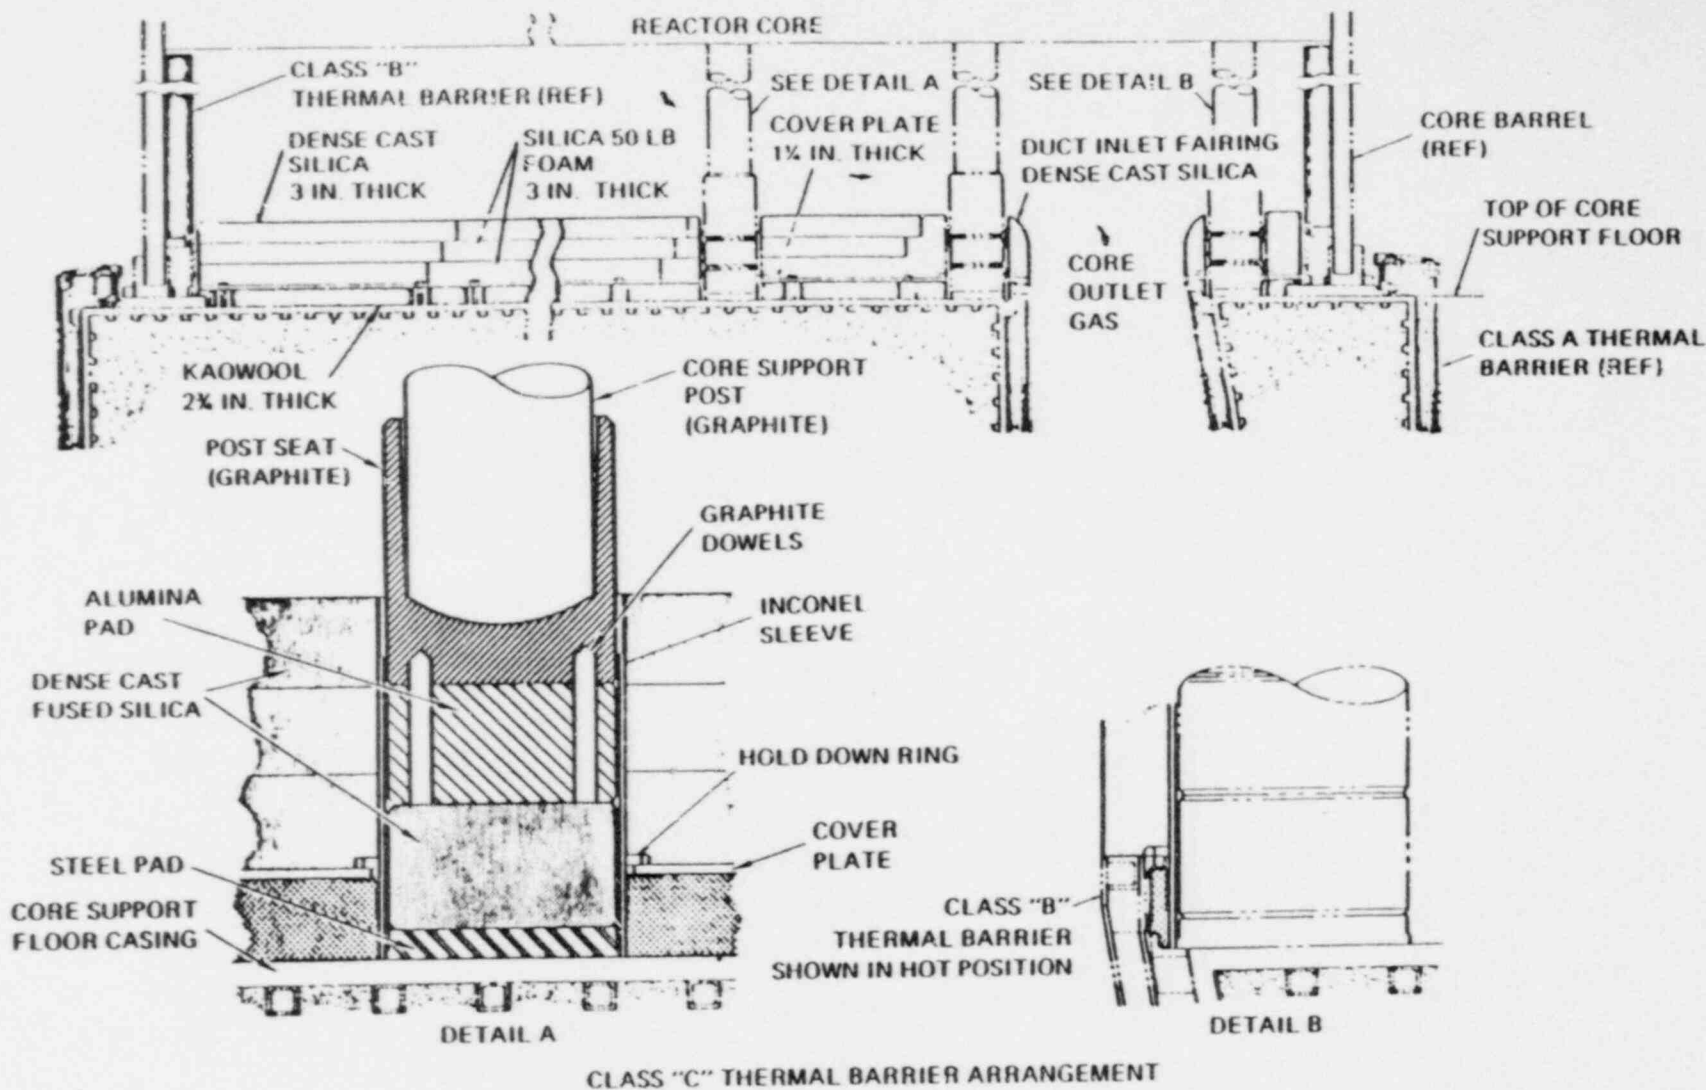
Class "C" Core Support Floor Upper Surface Thermal Barrier Arrangement
